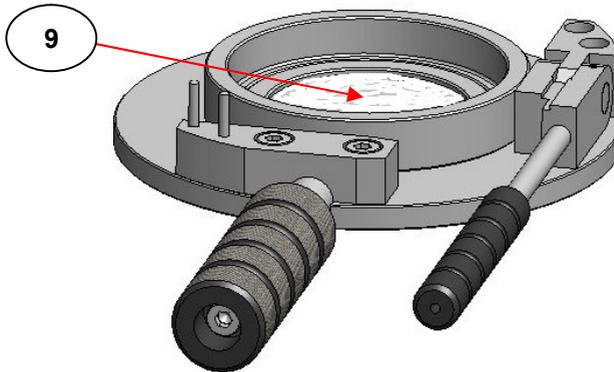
Lower Platen Pressing Assembly with Spacer Ring, Guide Ring, Lower Aluminium Foil and Sample
